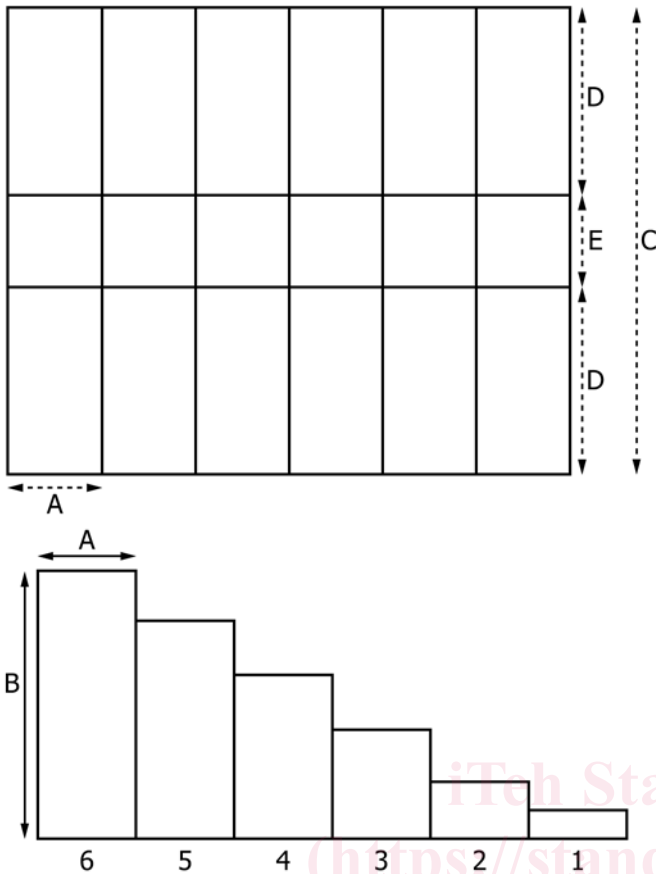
Step-Wedge Drawing (Dimensions Are Listed in Table 1)
